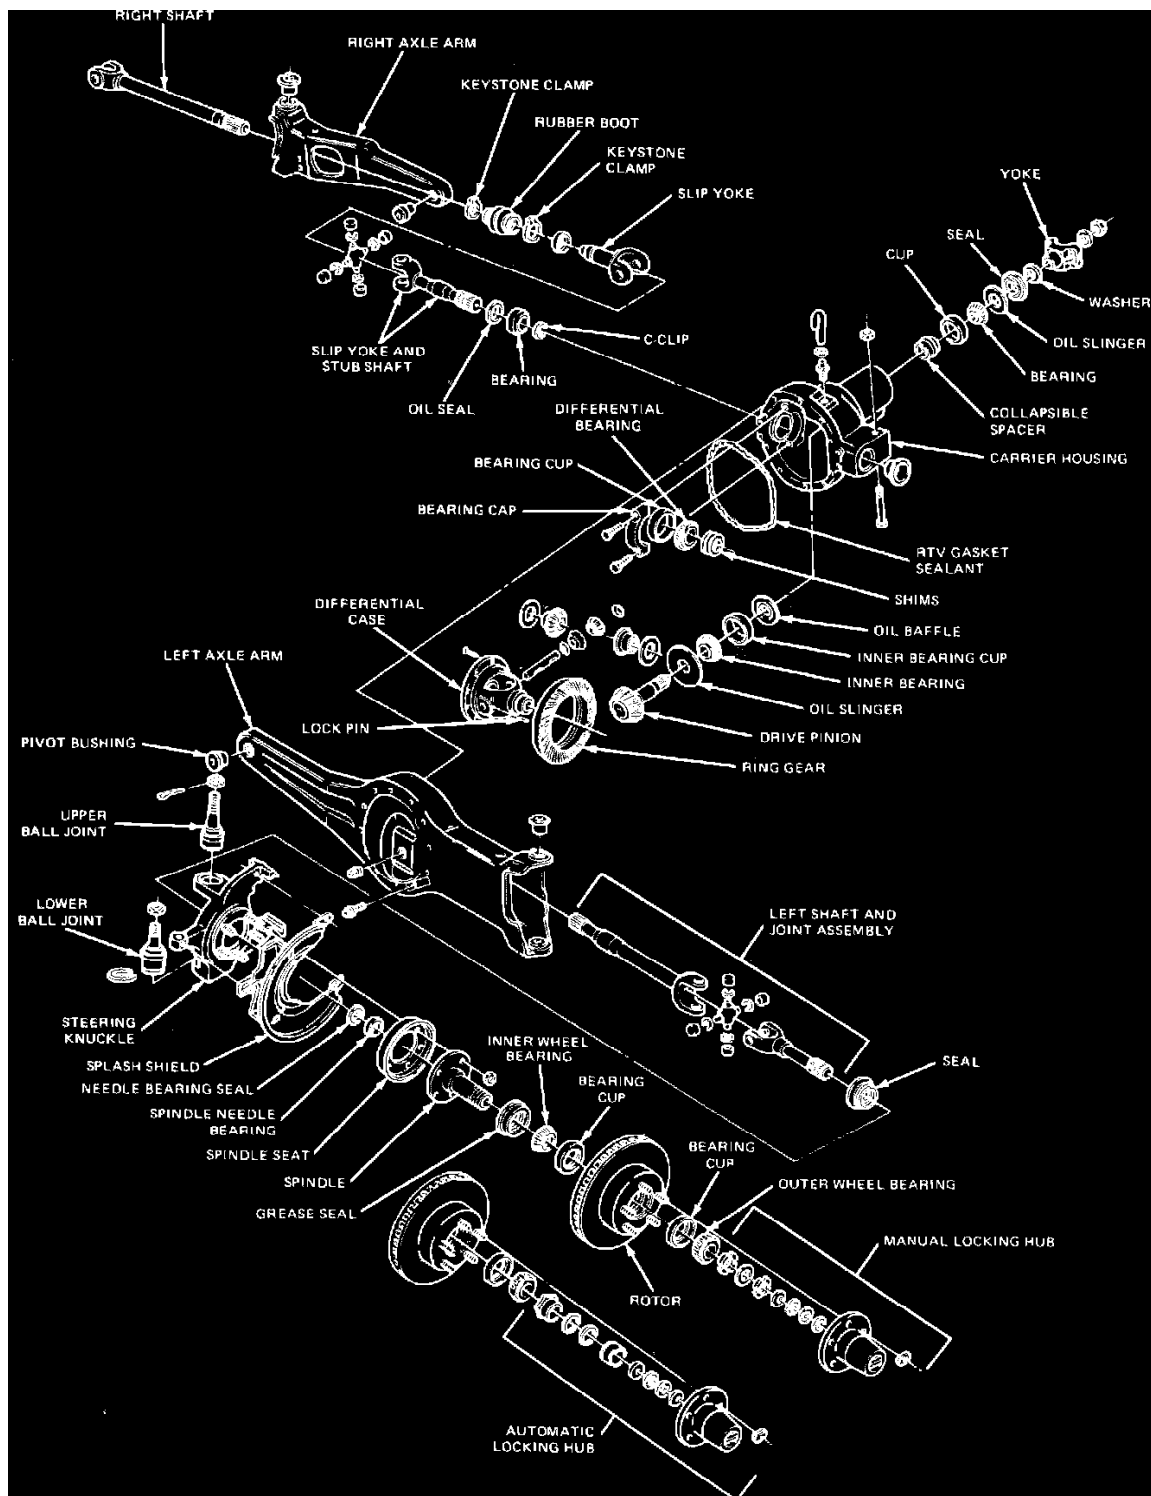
Disassembled view of Dana/Spicer model 28 front drive axle
